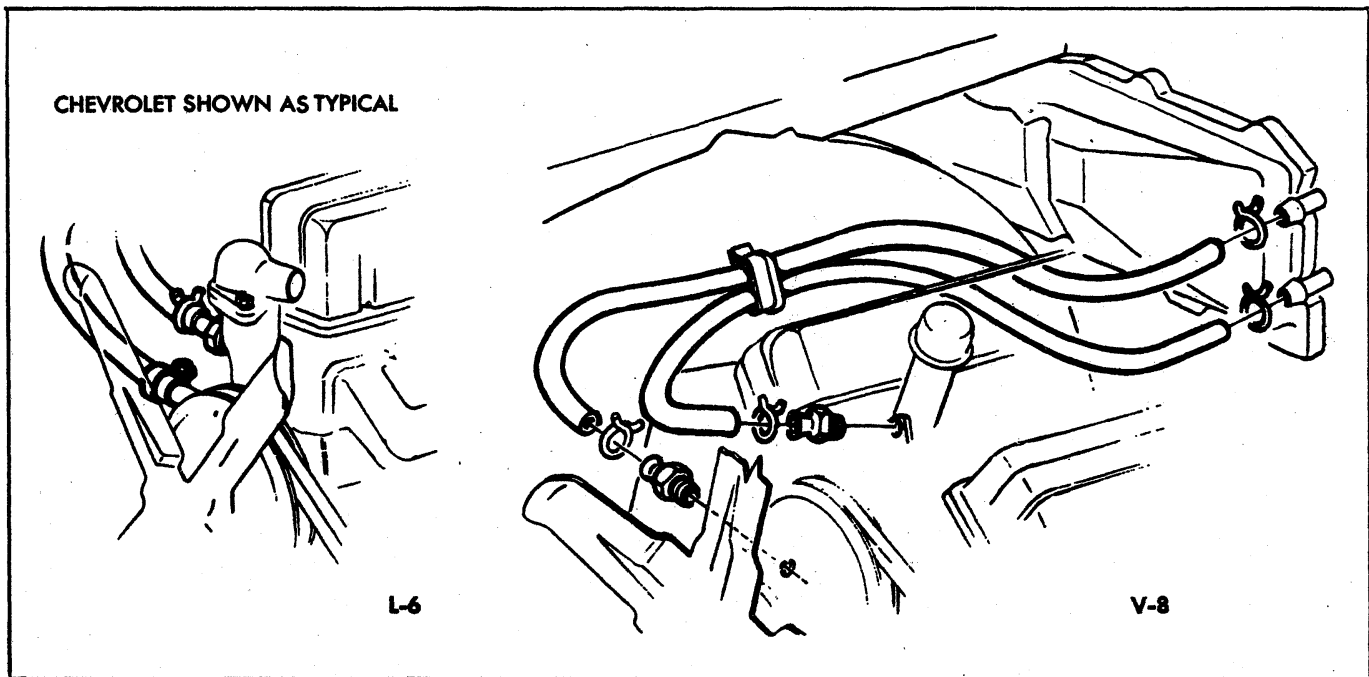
Heater Hose Routing (Chevrolet Shown as Typical)
